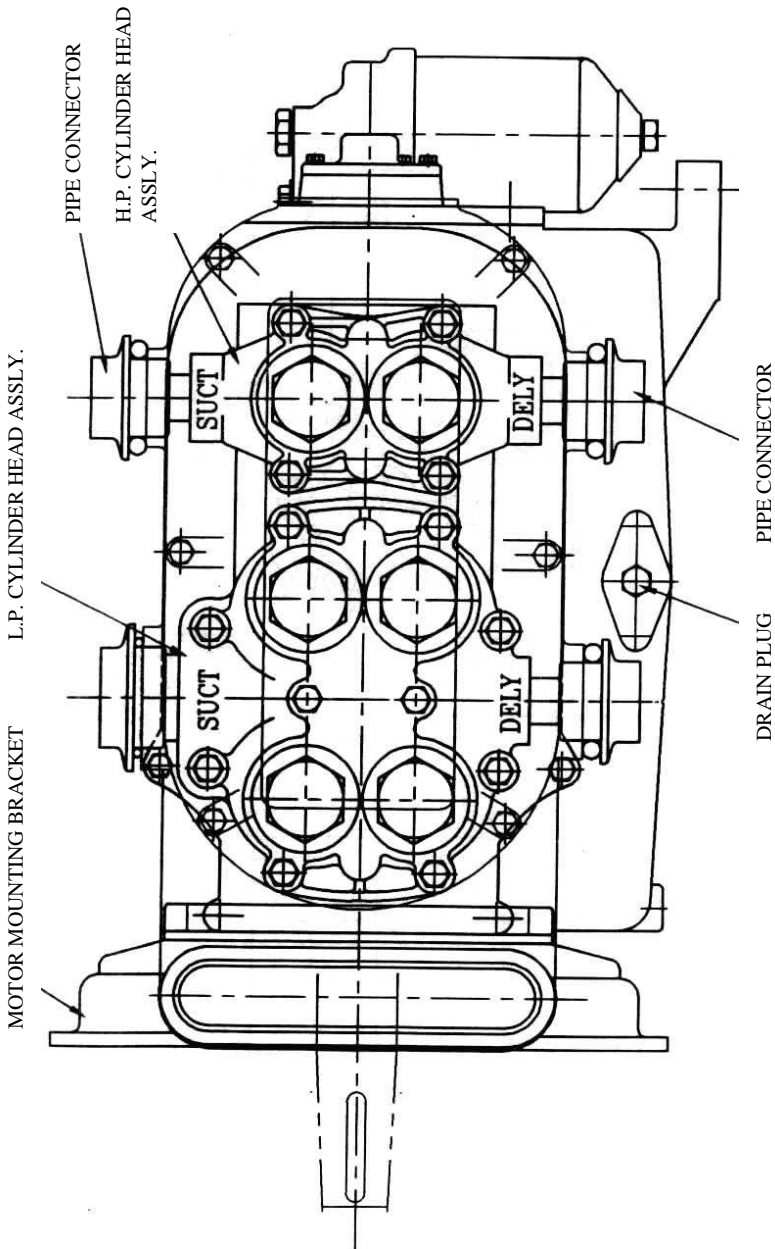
KIRLOSKAR AIR COMPRESSOR ASSEMBLY
